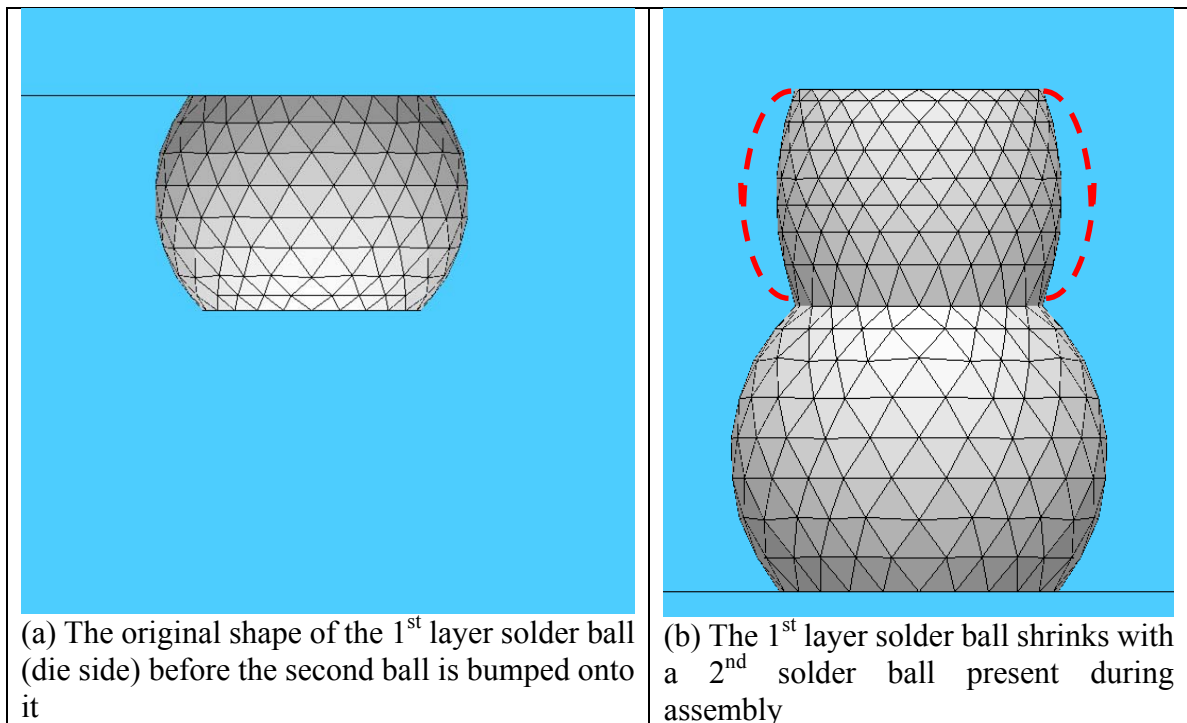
The shrinkage problem for the original solder ball during the assembly process
